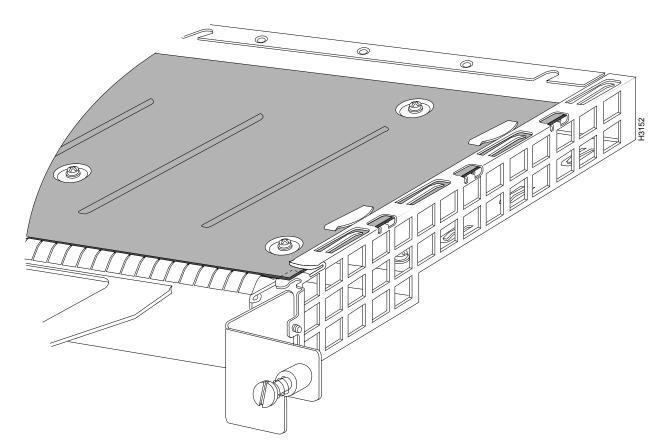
Aligning the Carrier Edge with Upper and Lower Slot Edges, Partial View
